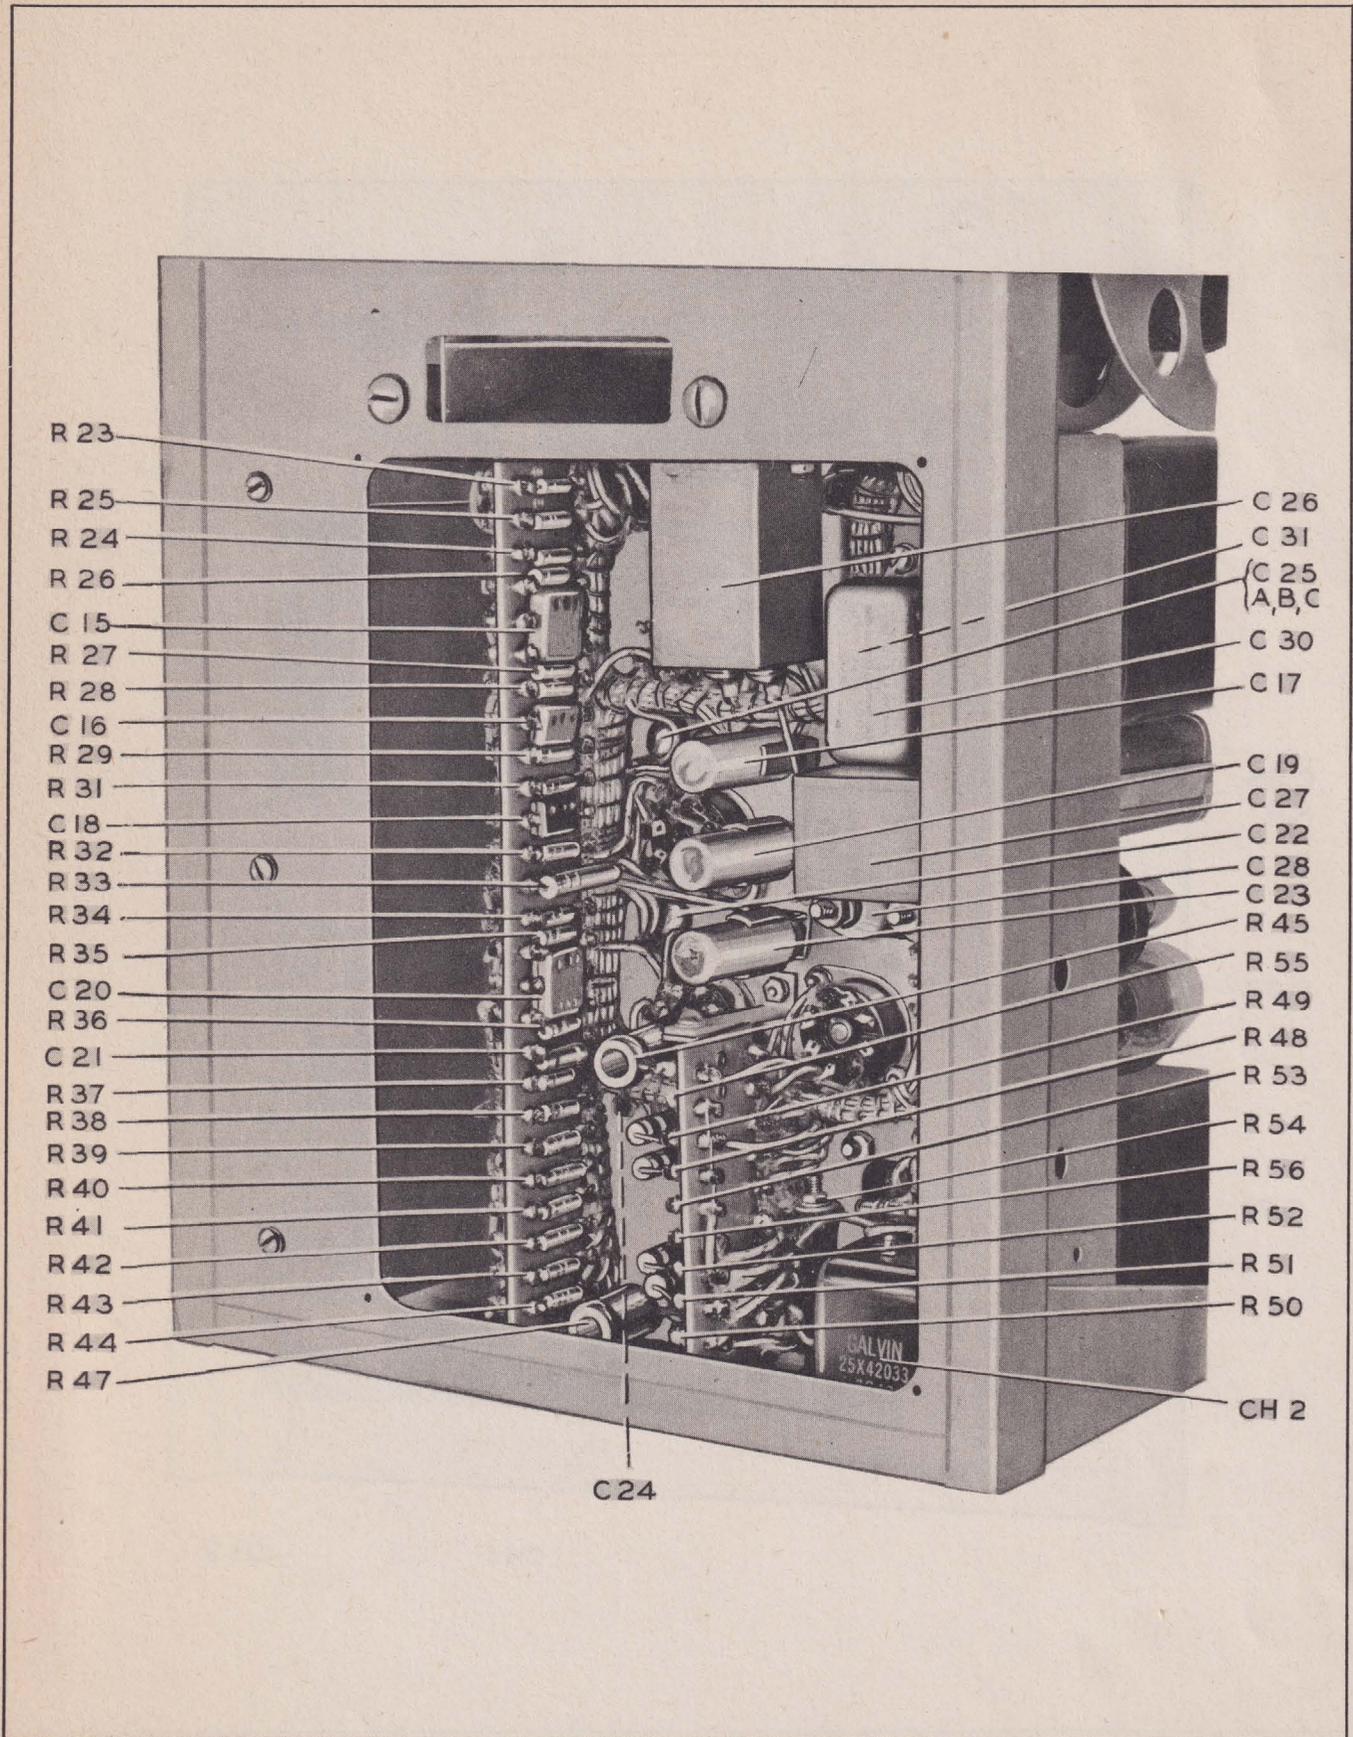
Radar Receiver R-34/APR-2—Bottom View with Cover Removed (45-Degree View)
